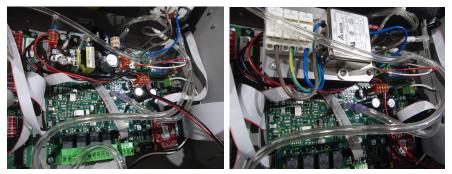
Power Supply Cable Assembly Left: PSU Removed Right: PSU Replaced - Complete
